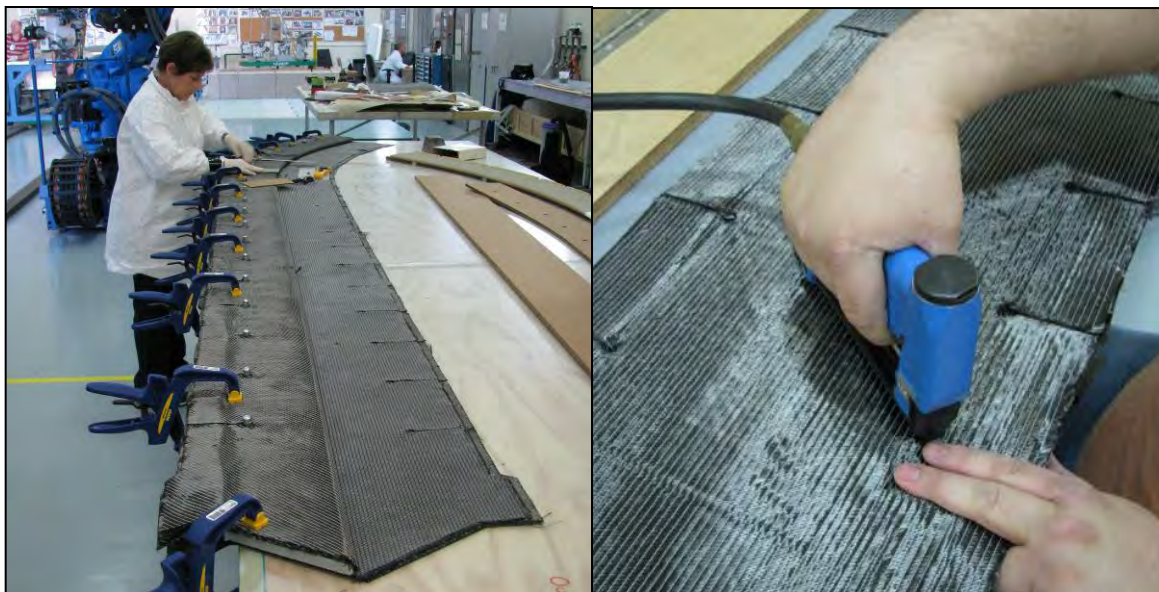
Complete Bulkhead Cap Preform for Crown Panel With Extended Flange Stacks
